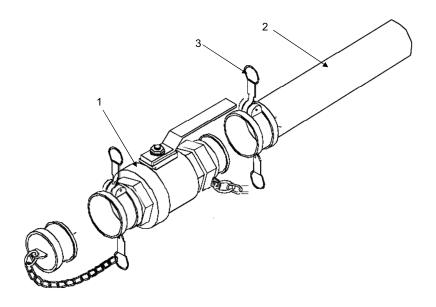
Filler/Discharge Ball Valve and Hose Assembly.
